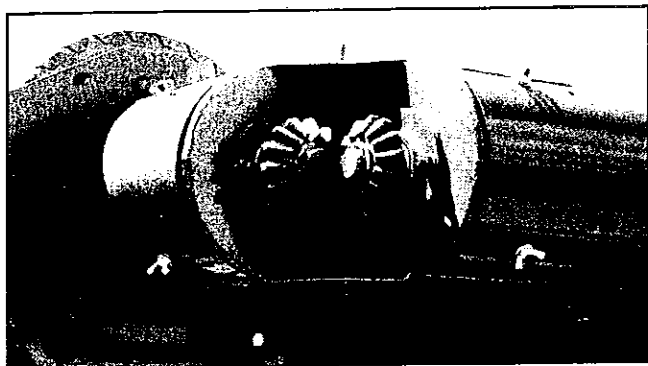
Discharge auger bevel gears (outer elbow) (shields removed for clarity).
